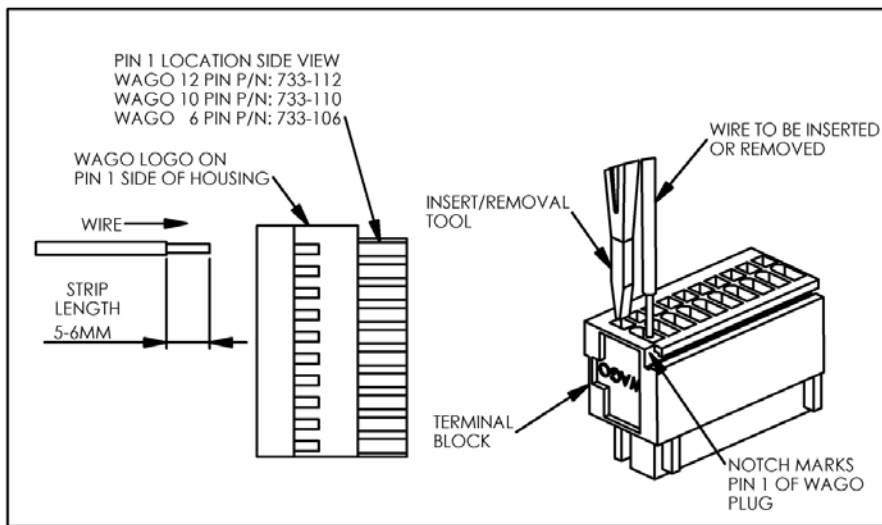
How To Insert and Remove Wires From the WAGO Plug
